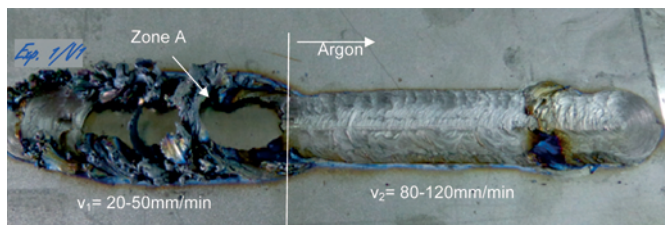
Appearance of welded joint - Ti Gr 2
